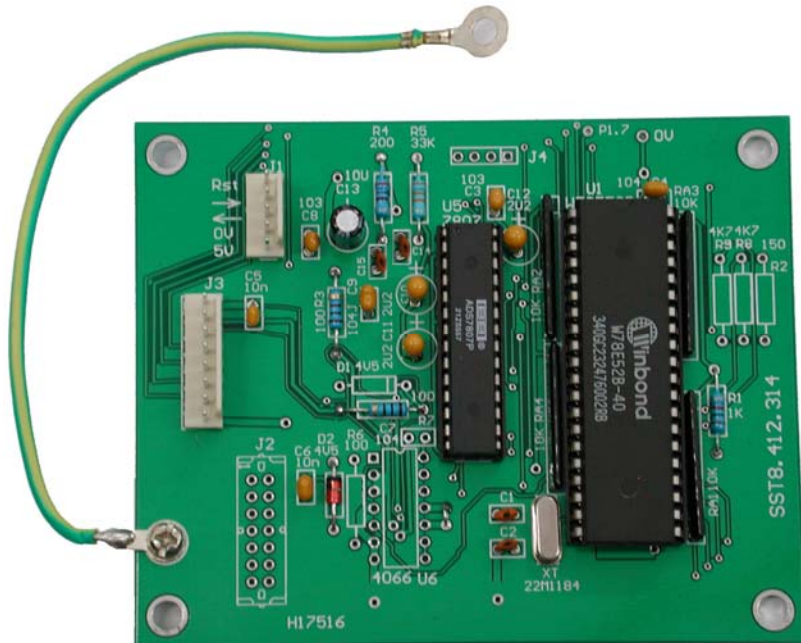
Layout of UV-2800, UV-2802(S) Slave CPU PCB
